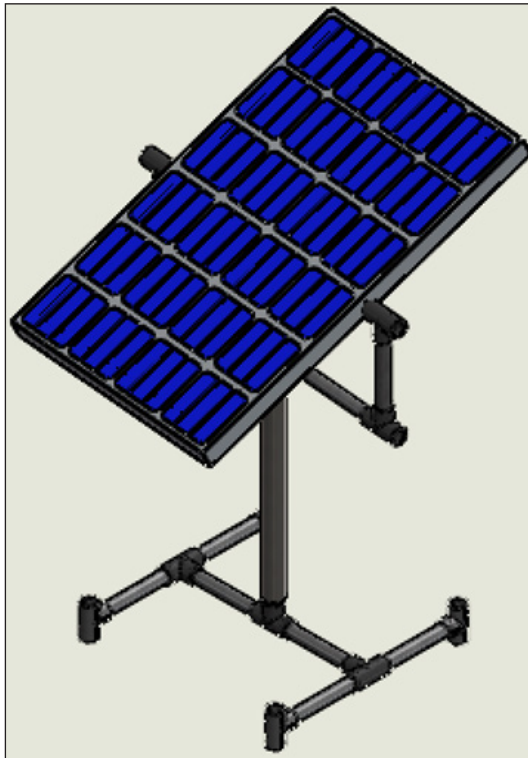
CAD Model of Complete Assembly of Structure Mounted with Solar Panel
